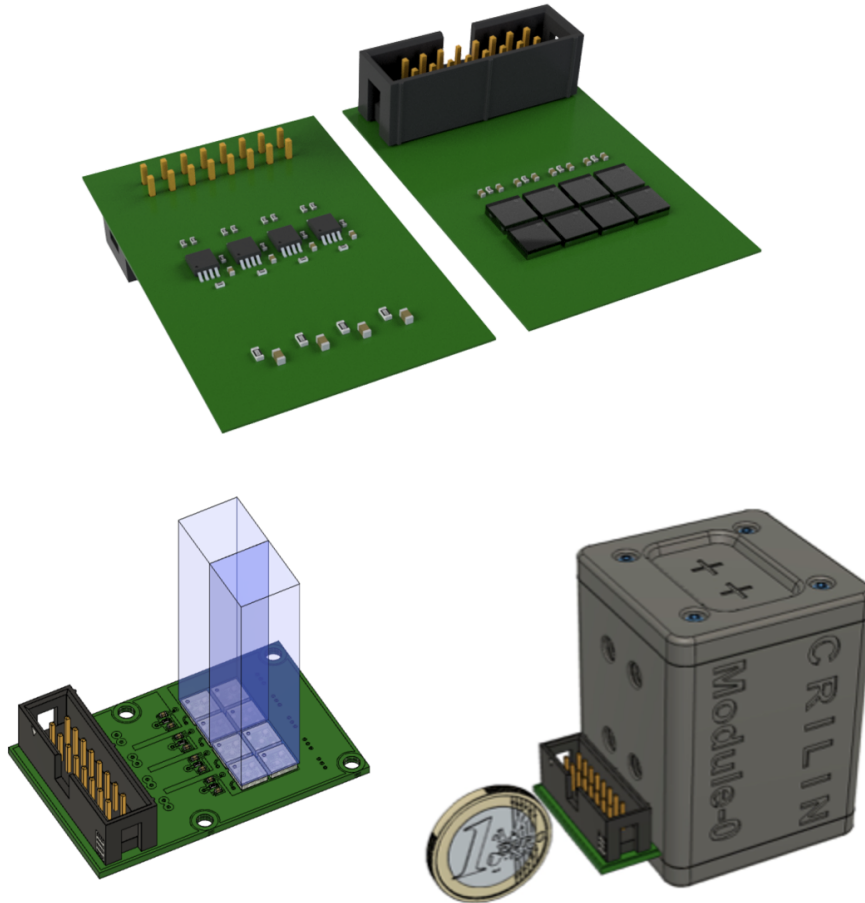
Rendering of the two-channel front end board prototype with 8 SiPMs and 2 crystals; PCB bottom (top left) and top view (top right), crystals installed (bottom left), Module-0 prototype.
